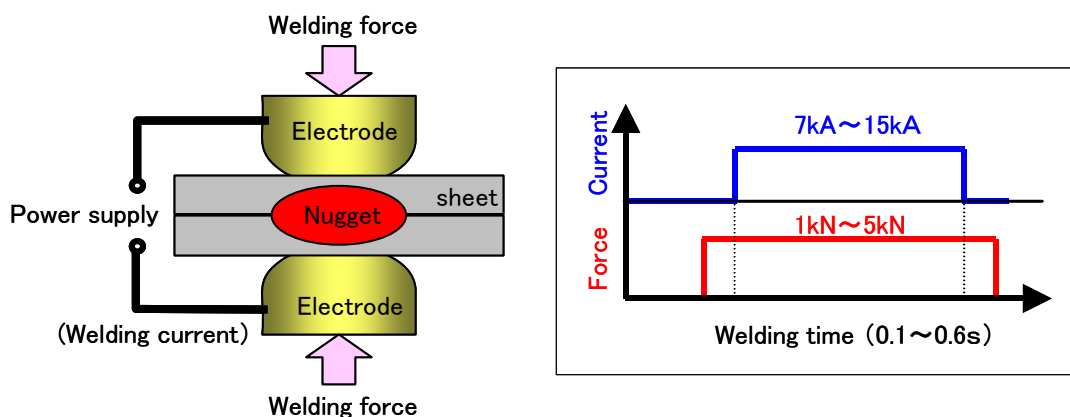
Schematic illustrations of resistance spot welding process.
